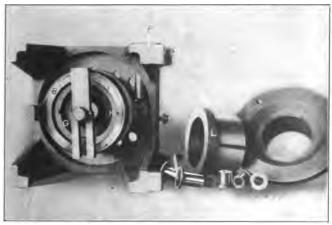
Drill Jig shown in Fig. 78 used for Drilling Friction Sleeve
